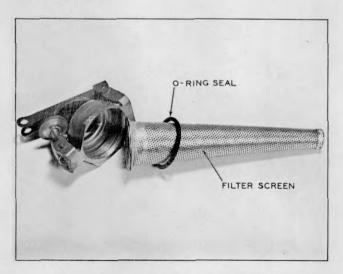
Diesel Fuel Tank Filler Cap and Screen
